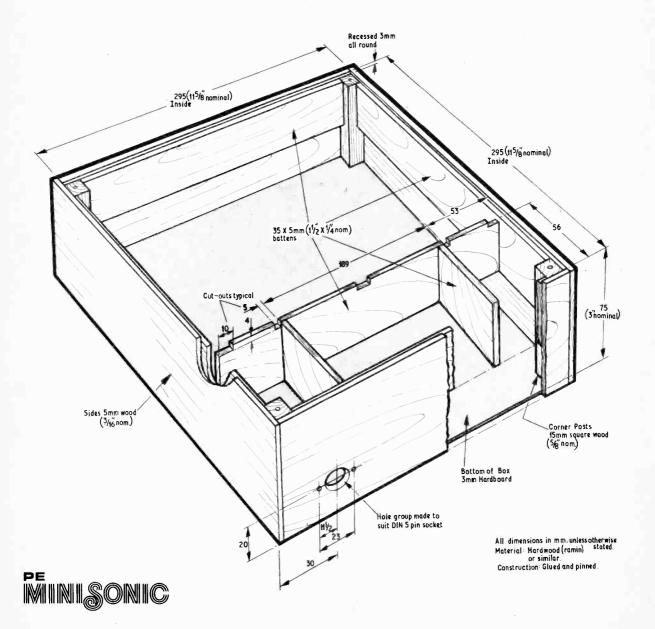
Details of the case assembly. Major dimensions are shown in inches (1in = 25.4mm)
